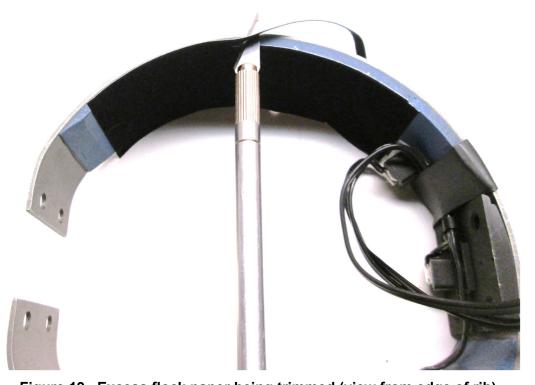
Excess flock paper being trimmed (view from edge of rib)
